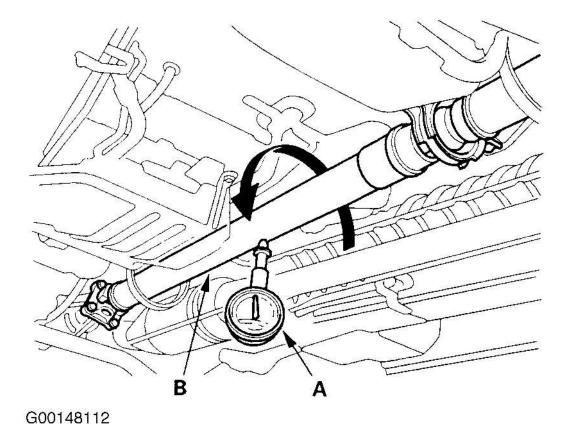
Identifying No. 1 Driveshaft Service Limit Courtesy of AMERICAN HONDA MOTOR CO., INC.
